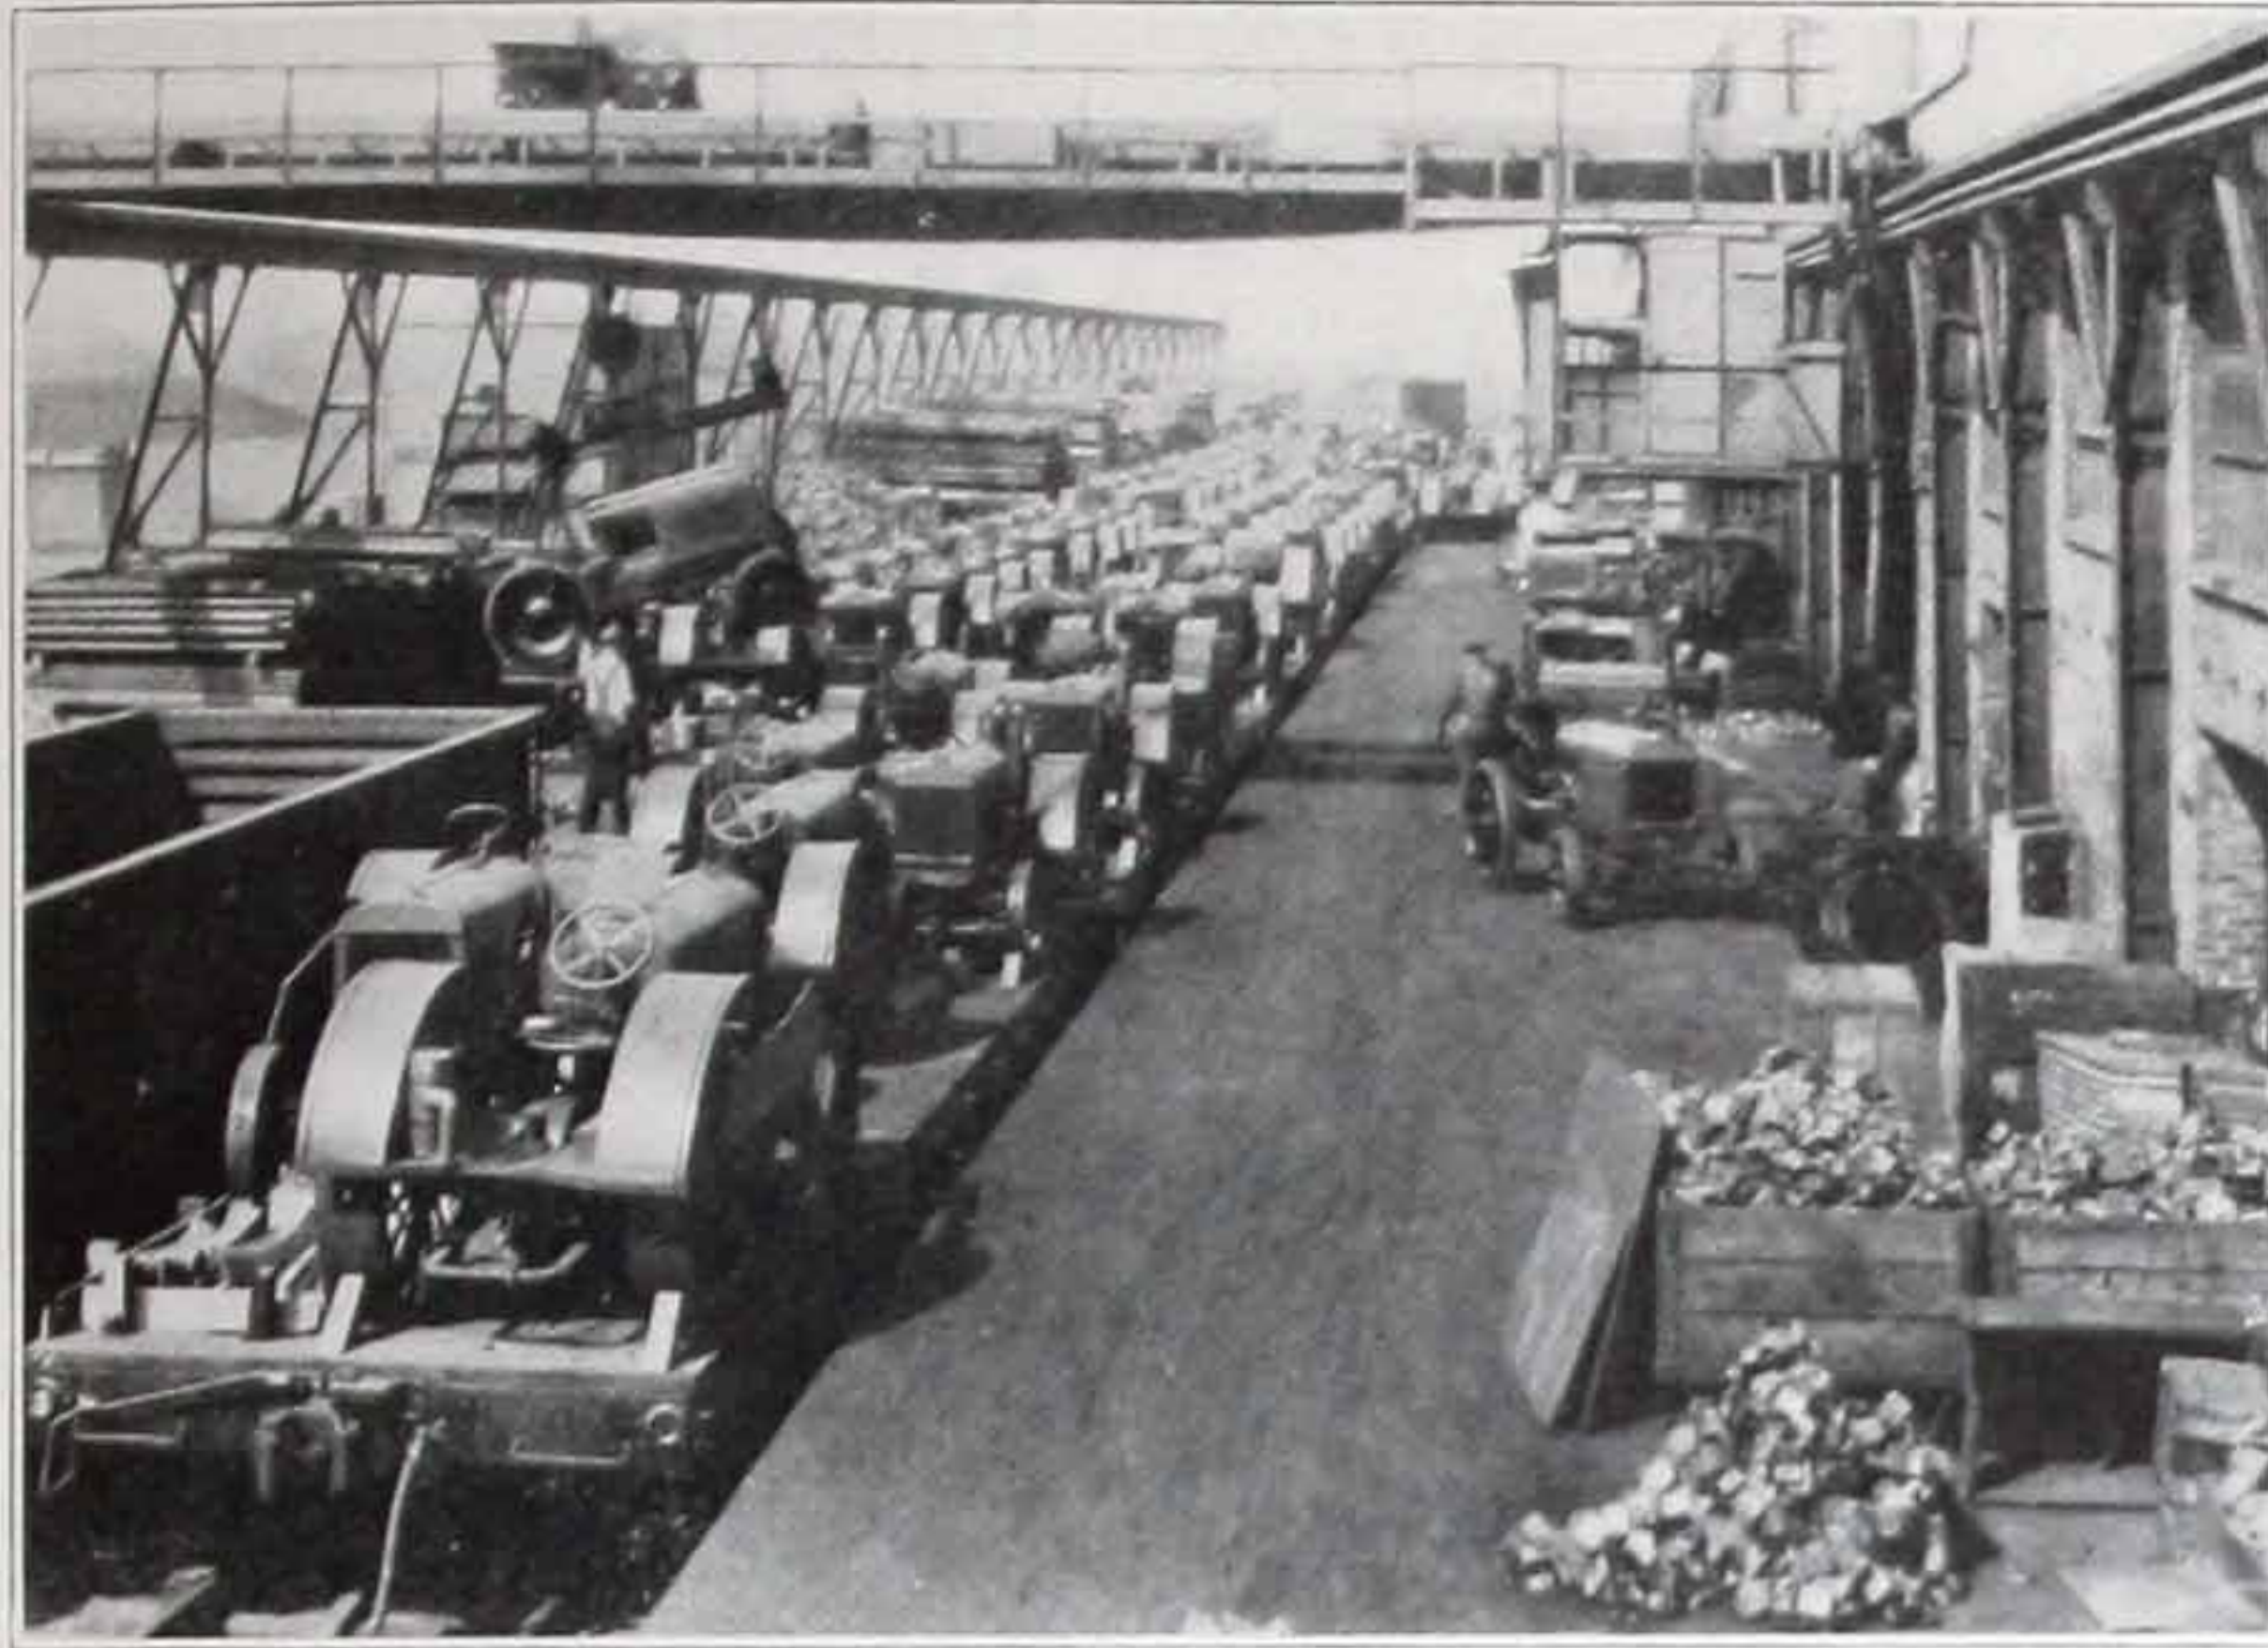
Equipment and machinery in course of shipment requires protection of vital parts against rust. A good rust preventive is needed to keep the frictional surfaces unimpaired by corrosive attack. When complete protection is not provided, premature wear and inefficient operation are likely to result.
